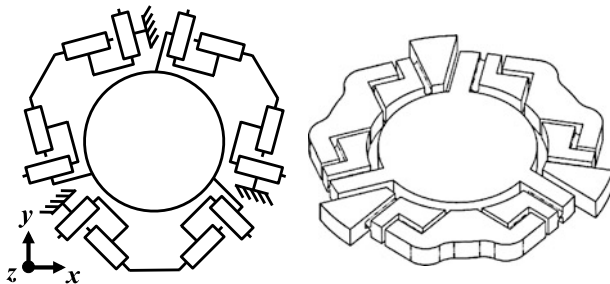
Kinematic scheme and CAD view of the 3-UU compliant mechanism.
